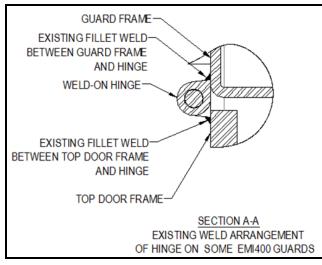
Hinge weld arrangement on some of the existing EMI guards
